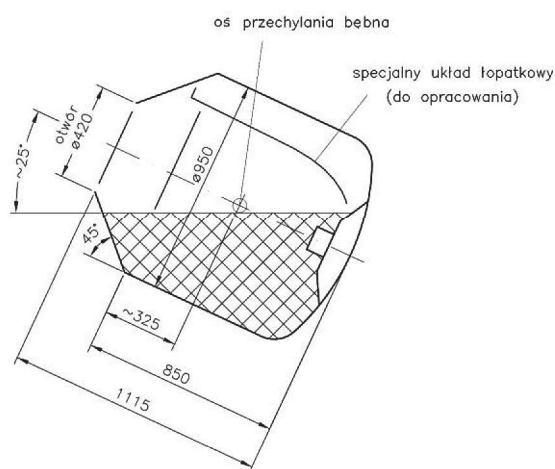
Installation drawing and main dimensions of the encapsulating drum
